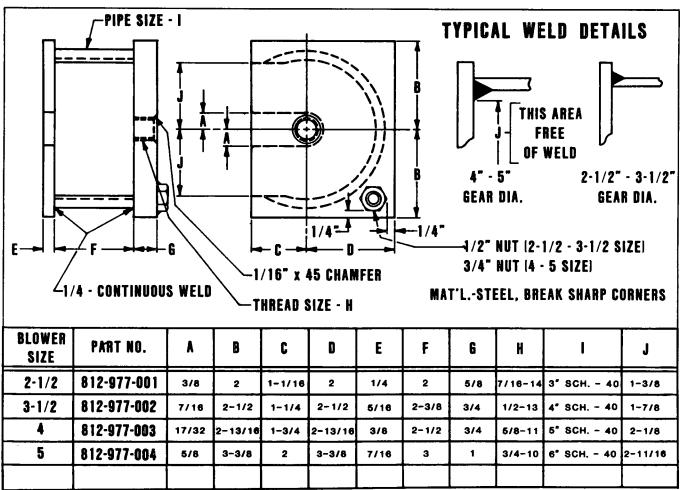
Gear Pullers for UNIVERSAL RAI® with Tapered Gear Bores
